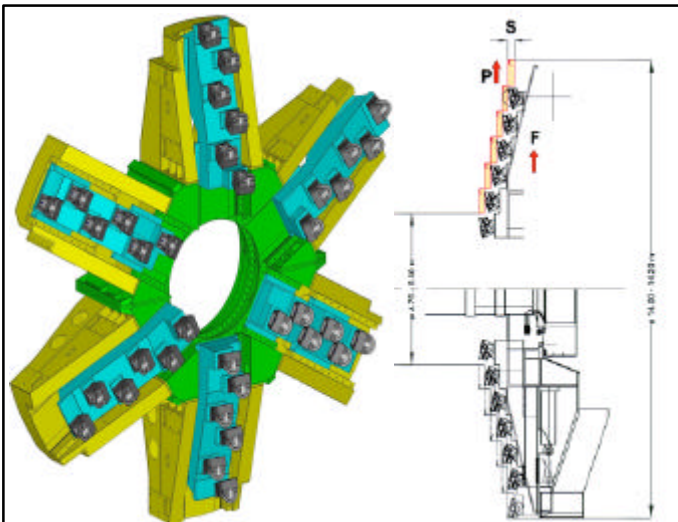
Boring head base and longitudinal section of boring head and power flow
